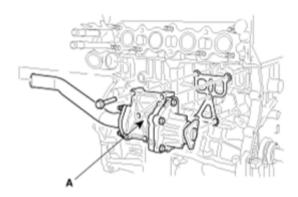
Identifying Water Pump Courtesy of KIA MOTORS AMERICA, INC.
